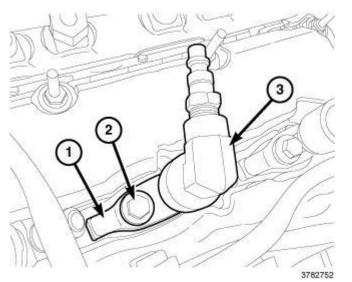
Fuel Injector Clamp, Compression Test Adapter & Bolt
